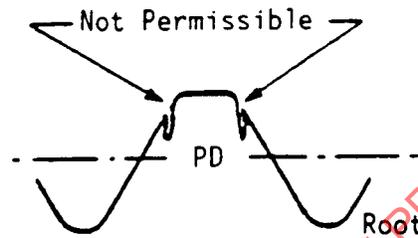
LAPS ABOVE PD EXTENDING TOWARD ROOT, ROLLED THREAD
